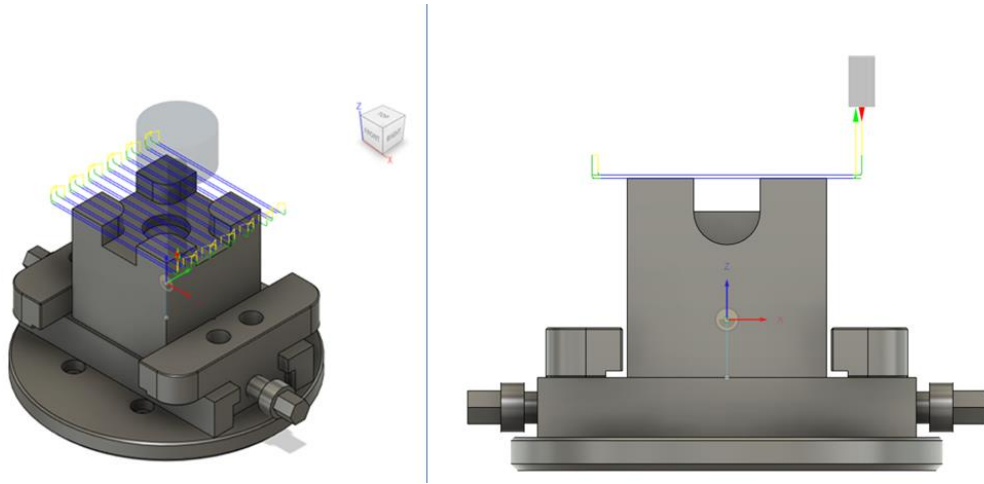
Face Operation Final Toolpath where it is visible the additional offset given the toolpath to assure that any error committed on the stock placement will not have any result on the final part
